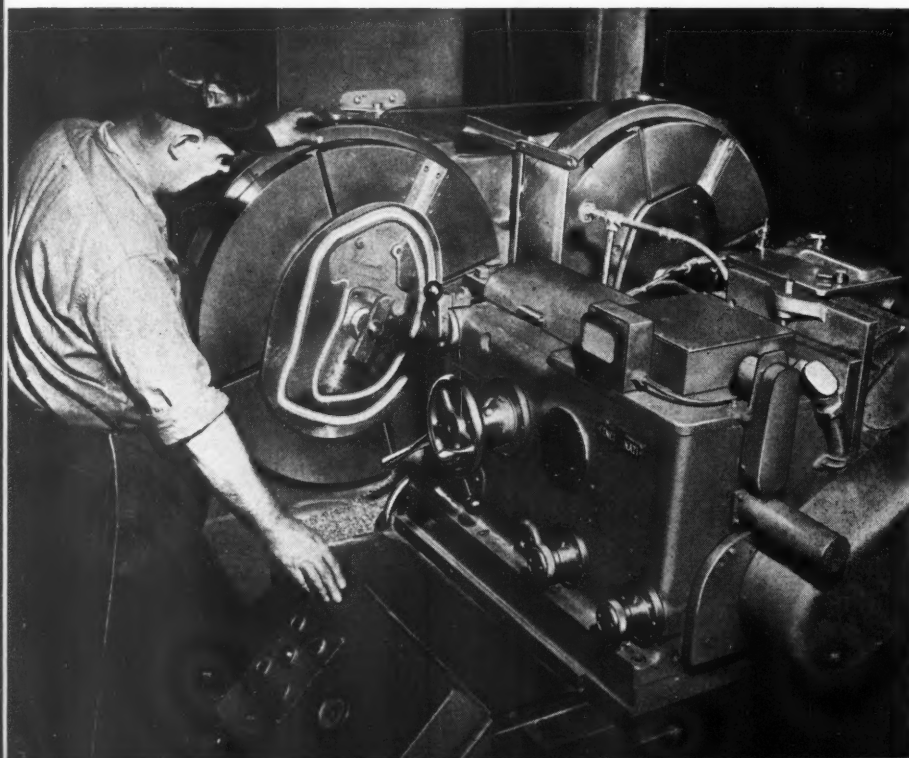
Face cams are produced in special machines having two 32-inch diameter vertical faceplates, one of which holds the work and the other a master cam
